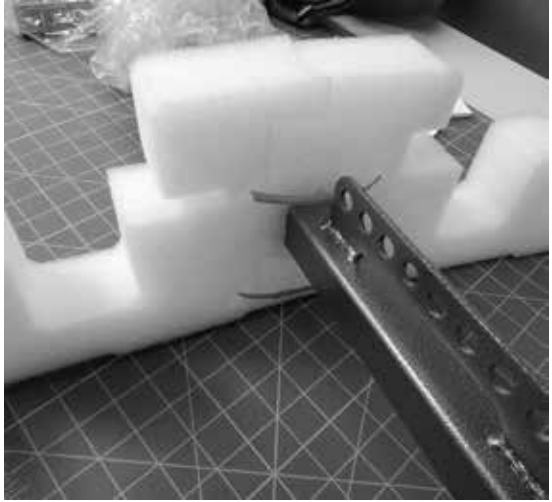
Front Assembly placed on Jeep before clipping in the rear assembly
